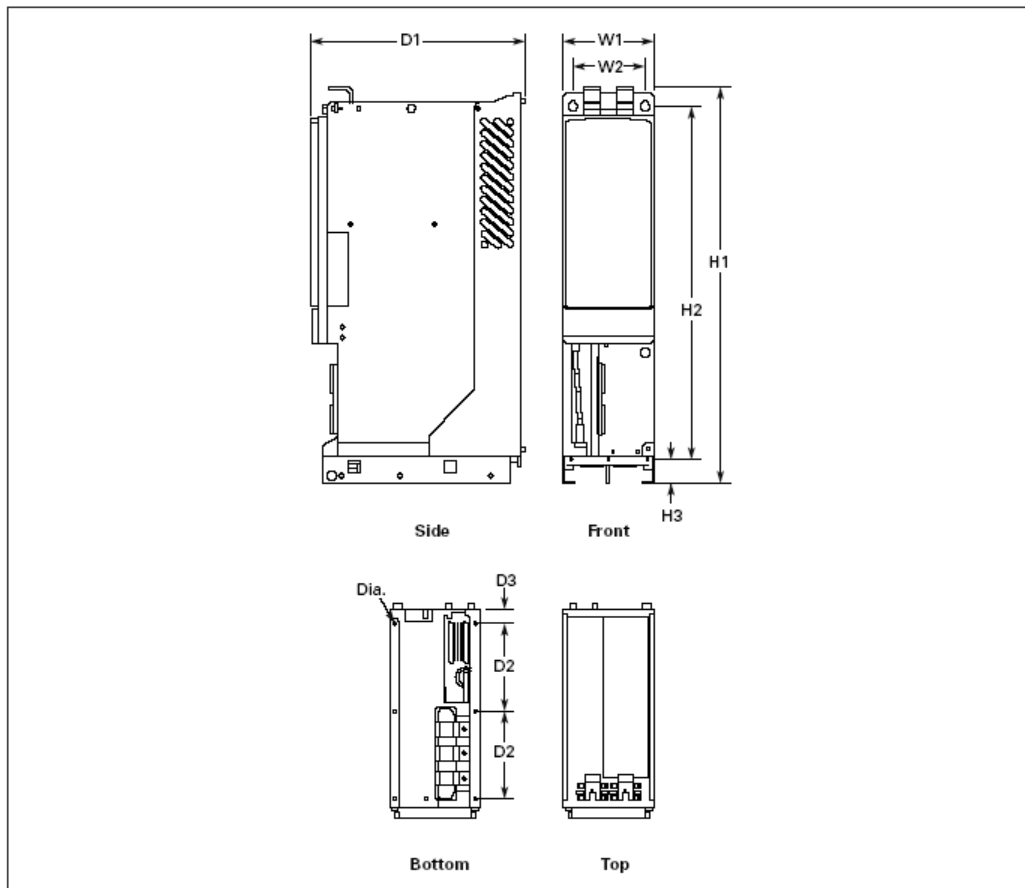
ACCe500 FI10 Inverter Dimensions
